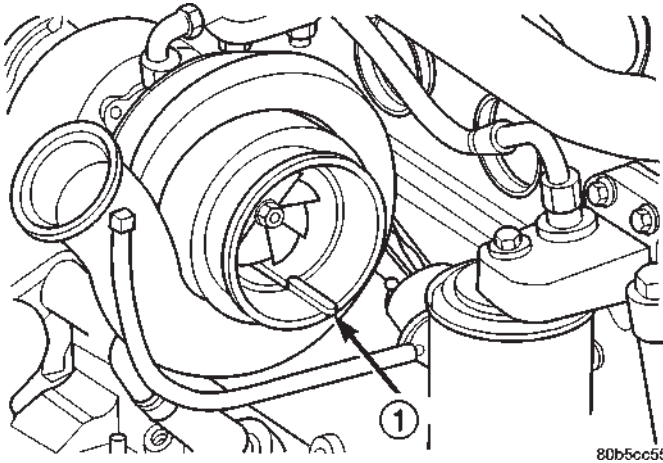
Measure Turbocharger Bearing Radial Clearance
